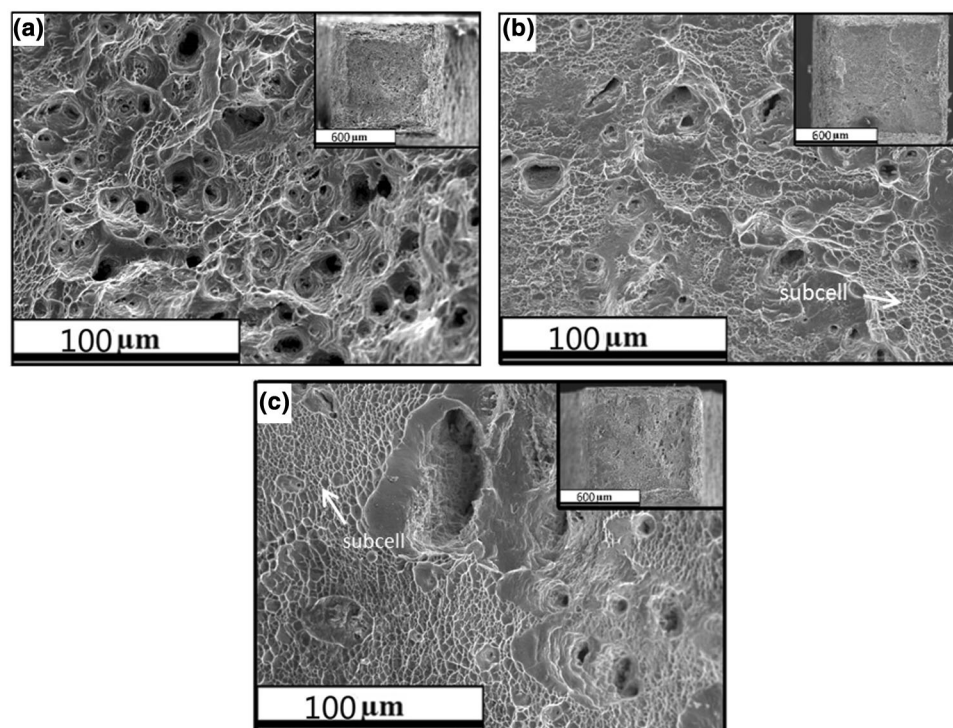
Fracture surfaces of TWIP steel after tensile test (a) initial condition, (b) 1 pass at room temperature, (c) 1 pass at 300 °C
